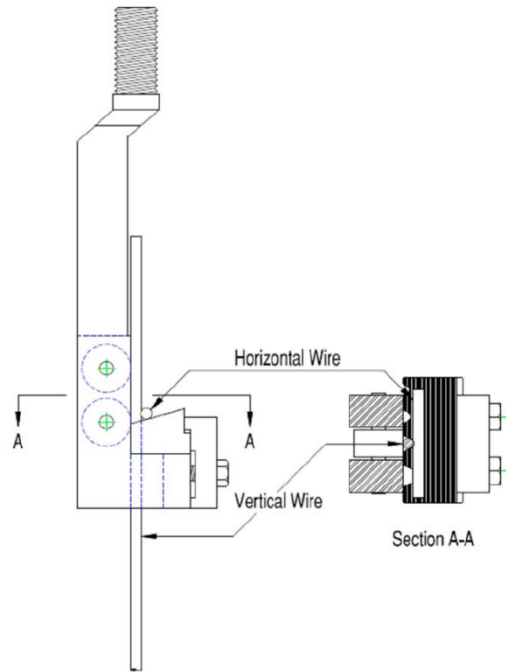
Welded Wire Reinforcement Weld Tester (ASTM 1064 – Fig. 1)
